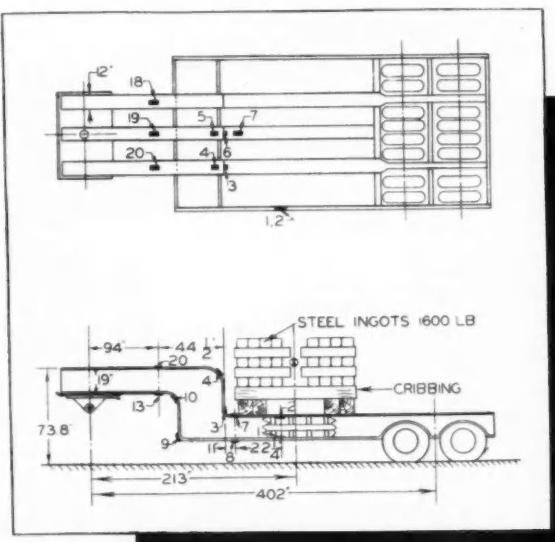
Sketch of 110-ton Carryall showing location of strain gages and basic dimensions.
